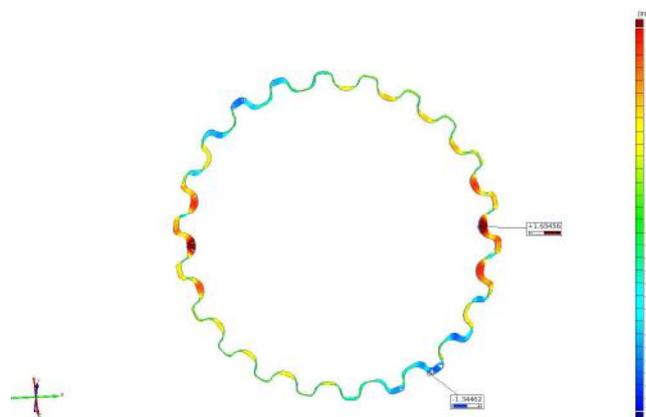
Non-circular pulley from valve timing of the combustion engine.
